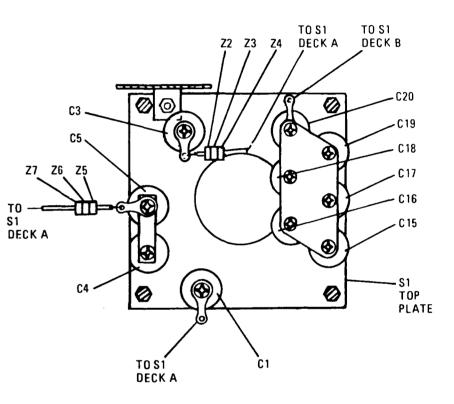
Final Transformer Assembly 1A1A2, Part No. 10051-3700, Component Locations (Sheet 1 of 5)
